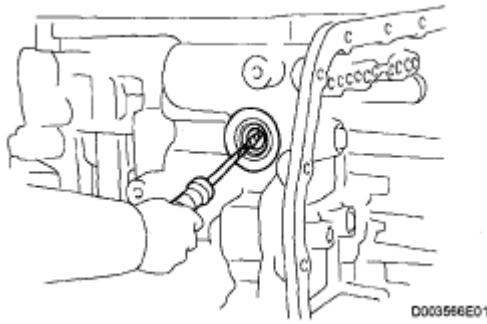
Removing Manual Valve Lever Shaft Oil Seal
